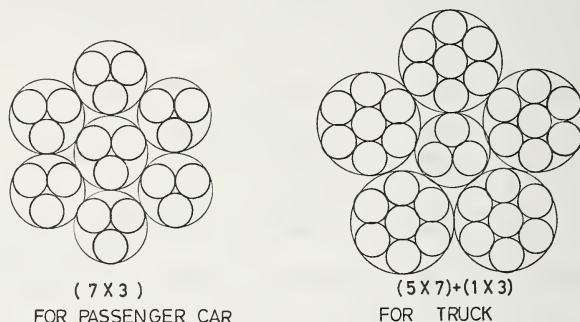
Typical cord constructions of steel wires.
